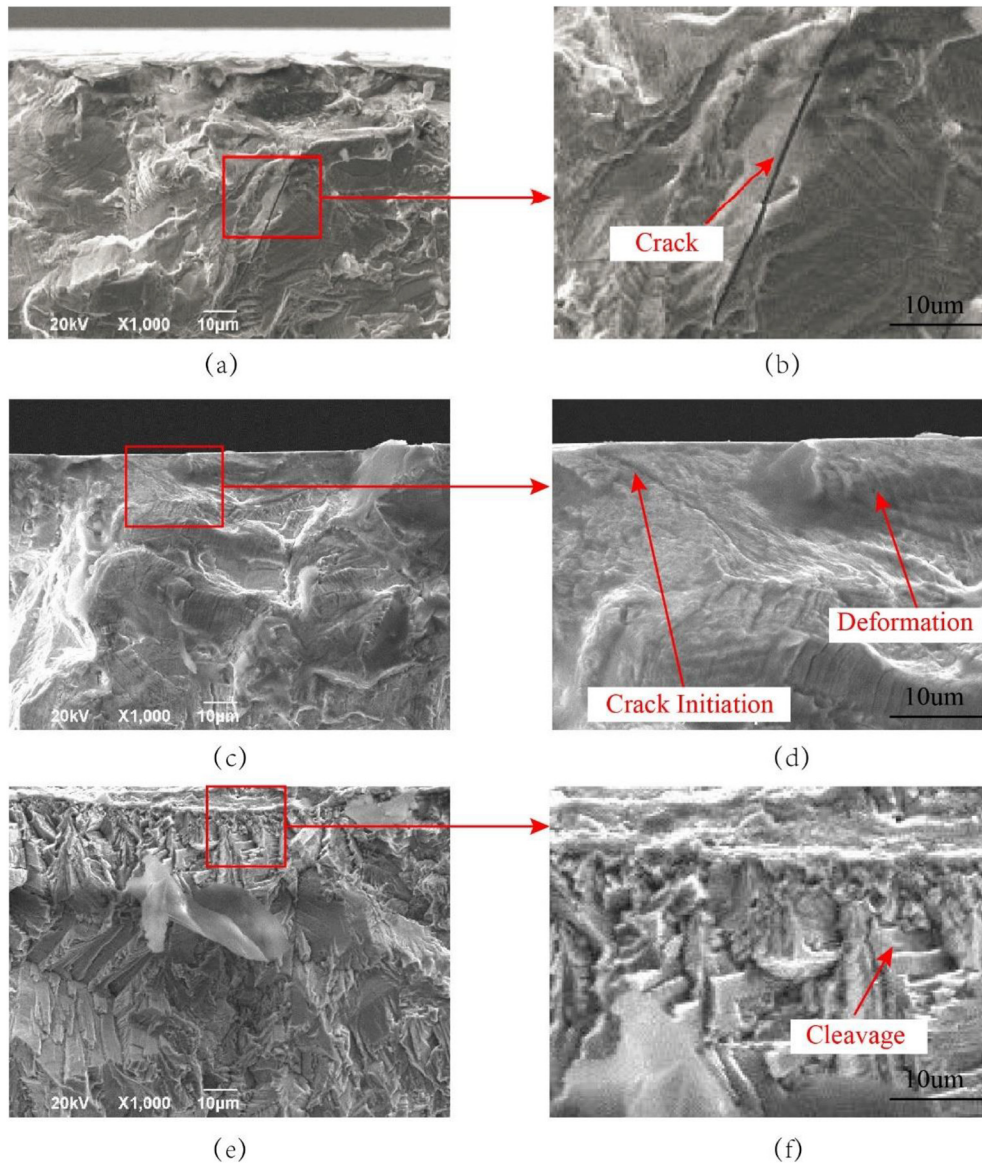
Fracture surface morphology of samples after fatigue testing: LAMill-(a) and (b); CMill-(c) and (d); LS-(e) and (f).
